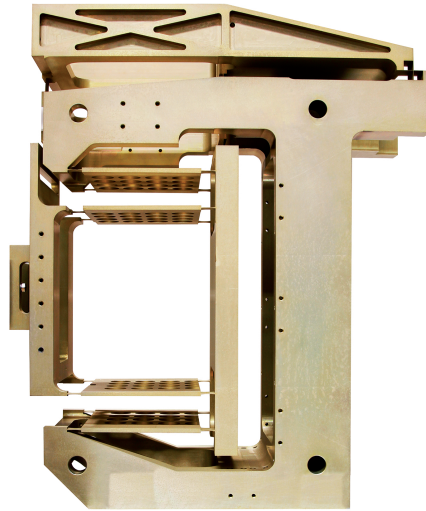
Photograph of the 13-hinge stage prototype. The outer dimensions are $450\text{ mm} \times 350\text{ mm} \times 140\text{ mm}$. The piece was machined and then electroeroded.
